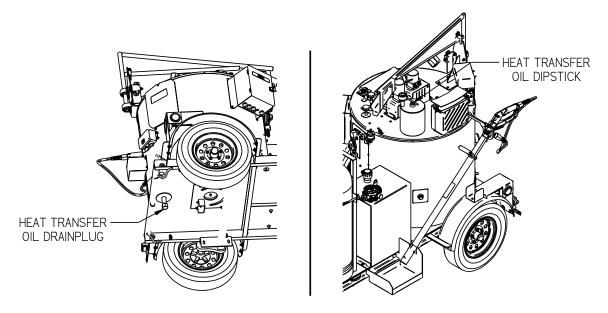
Heat Transfer Oil Drain and Fill Port
